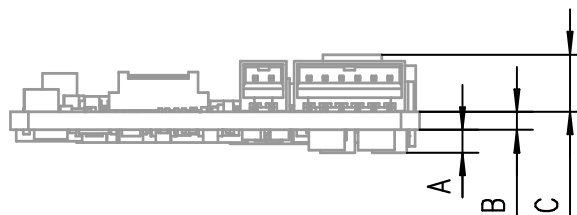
BR_XETK-S3.0 Dimensions - Side View
